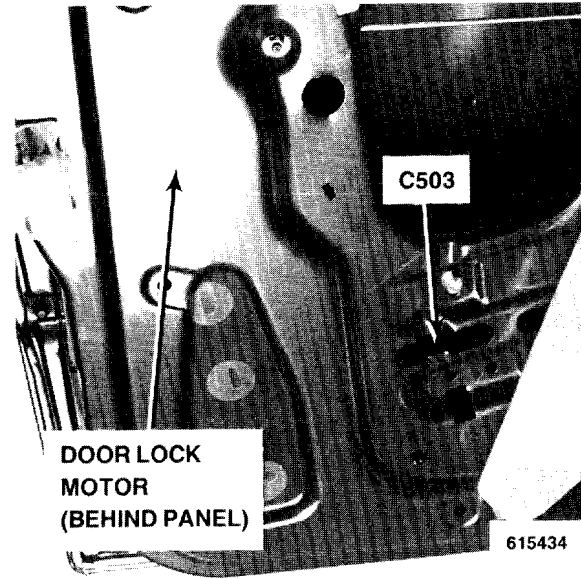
Inside Rear of LH Front Door (RH Similar)
